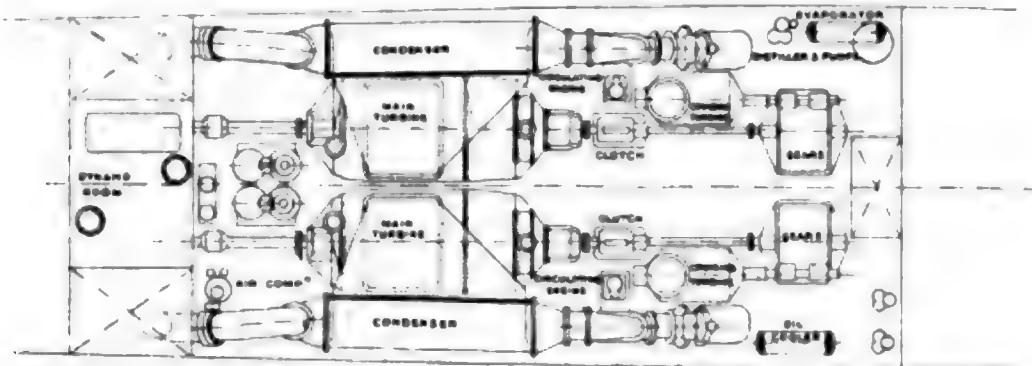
ARRANGEMENT OF MAIN TURBINES AND GEARED CRUISING TURBINES WITH CLUTCHES FOR DISCONNECTING CRUISING TURBINES FOR FULL SPEED.
